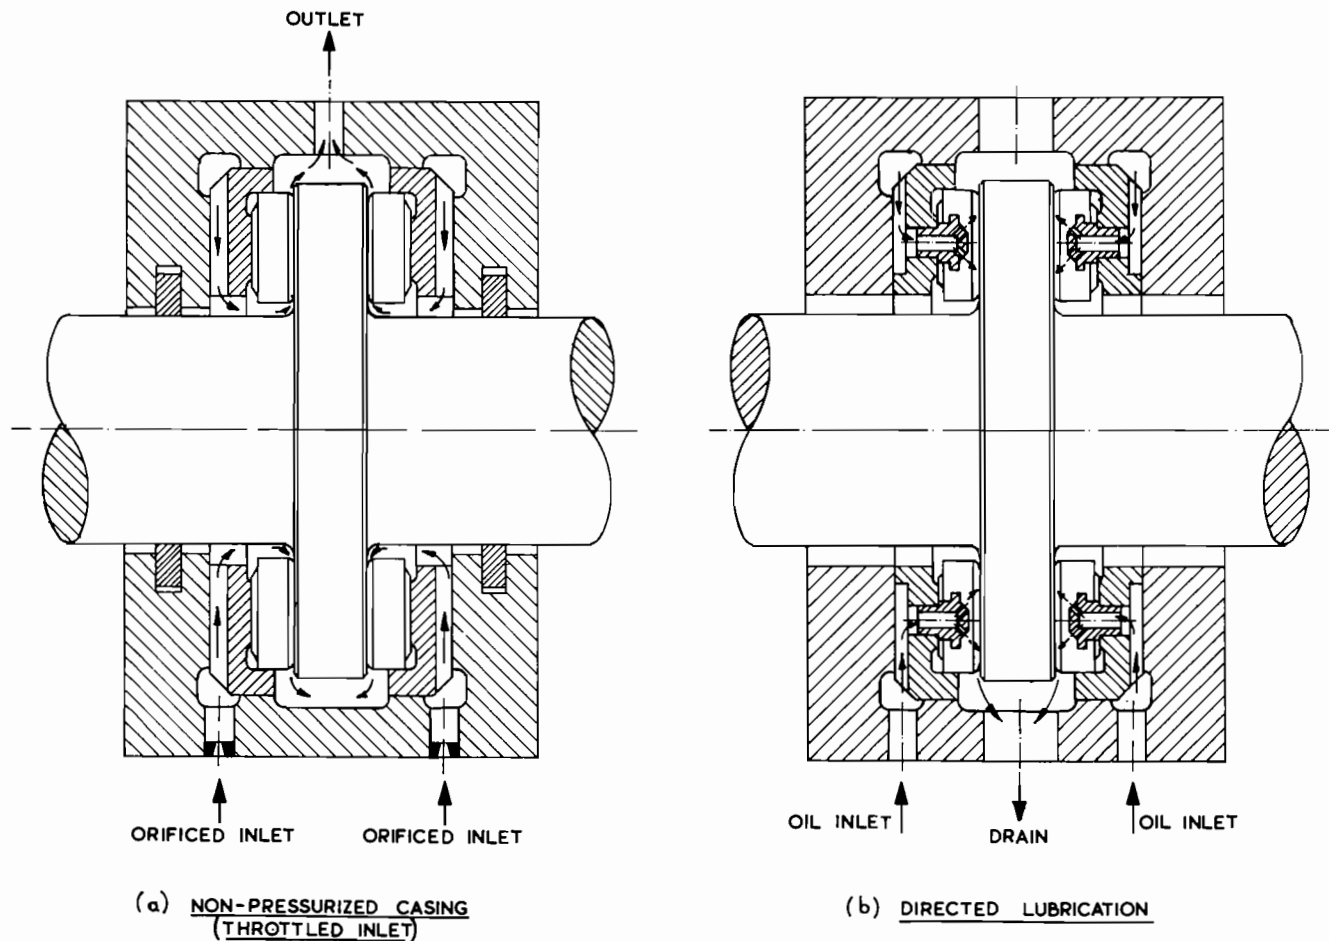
Lubrication Systems for Tilting Pad Thrust Bearings.
